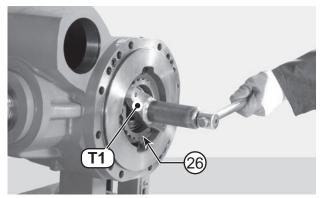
Only if ring nuts have been removed, preload bearings with ring nut (26) on non-ring gear side in order to increase the torque of the pinion.
